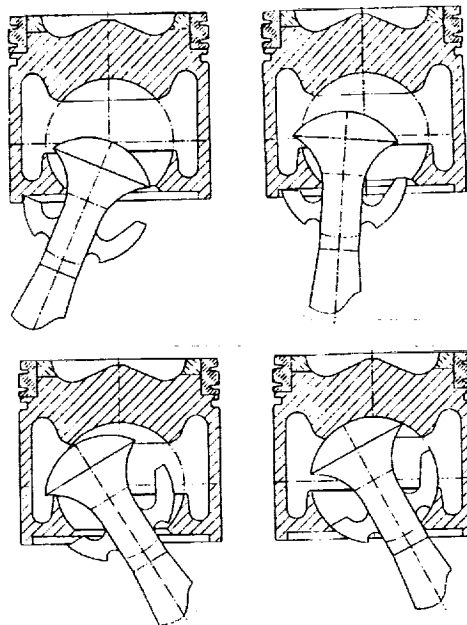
Proposed one-piece spherical joint piston design.
